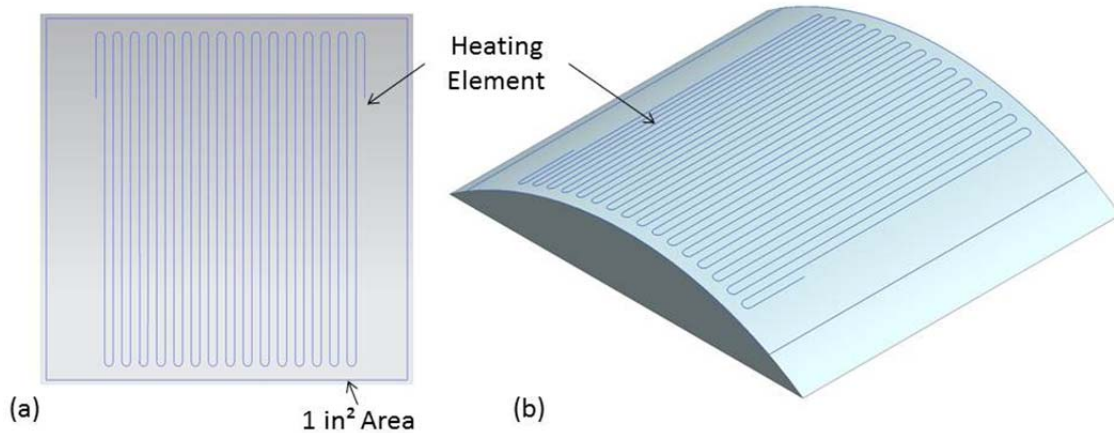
Drawings showing the design of the heating element and sizing: (a) 28.5 in length of wire within the square inch surface area, (b) heating element placed on heater surface area.
